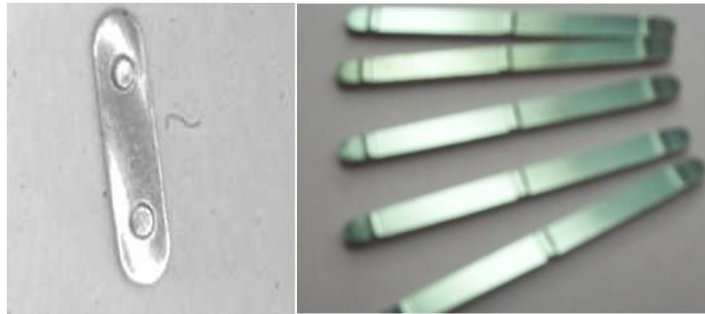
PHWR appendages, (a) Spacer pads; (b) Bearing pads
